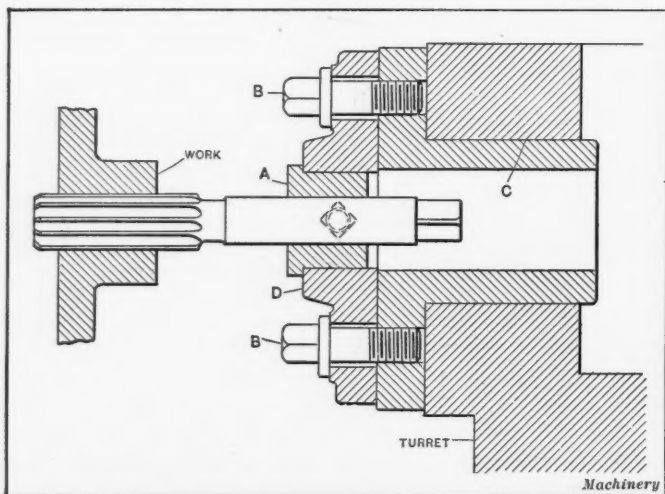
Reamer-holder with Means of adjusting to Spindle Alignment
